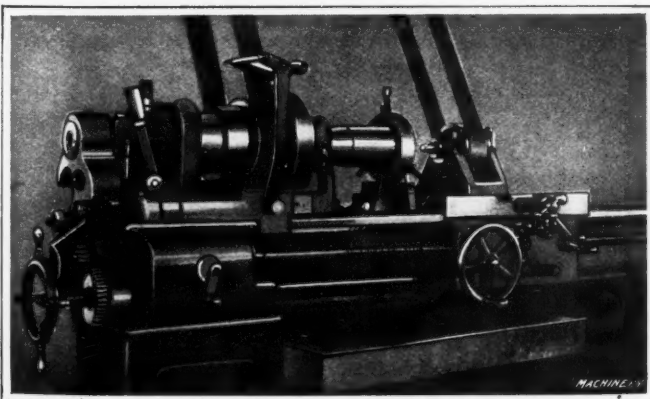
Engine Lathe equipped with Special Fixture for performing Thread Milling Operation on Shells
